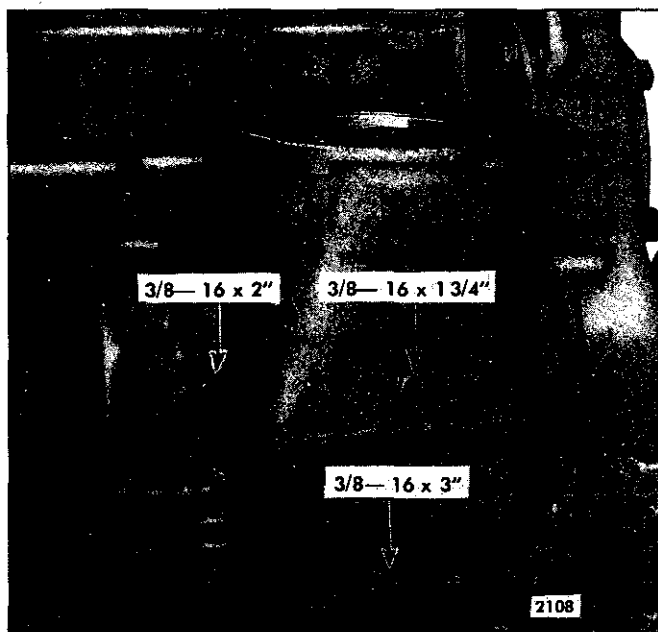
Location of Air Shutdown Housing Mounting Bolts (In-Line Engines)
